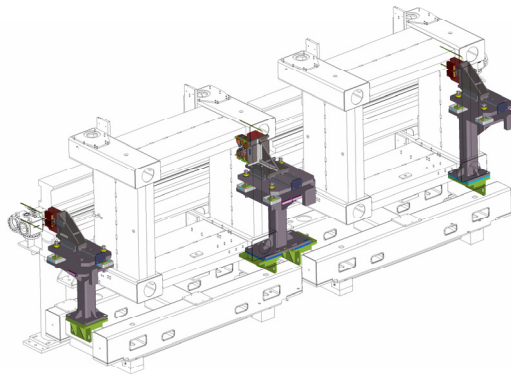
Canted undulator assembly with magnet assemblies shown in solid.
